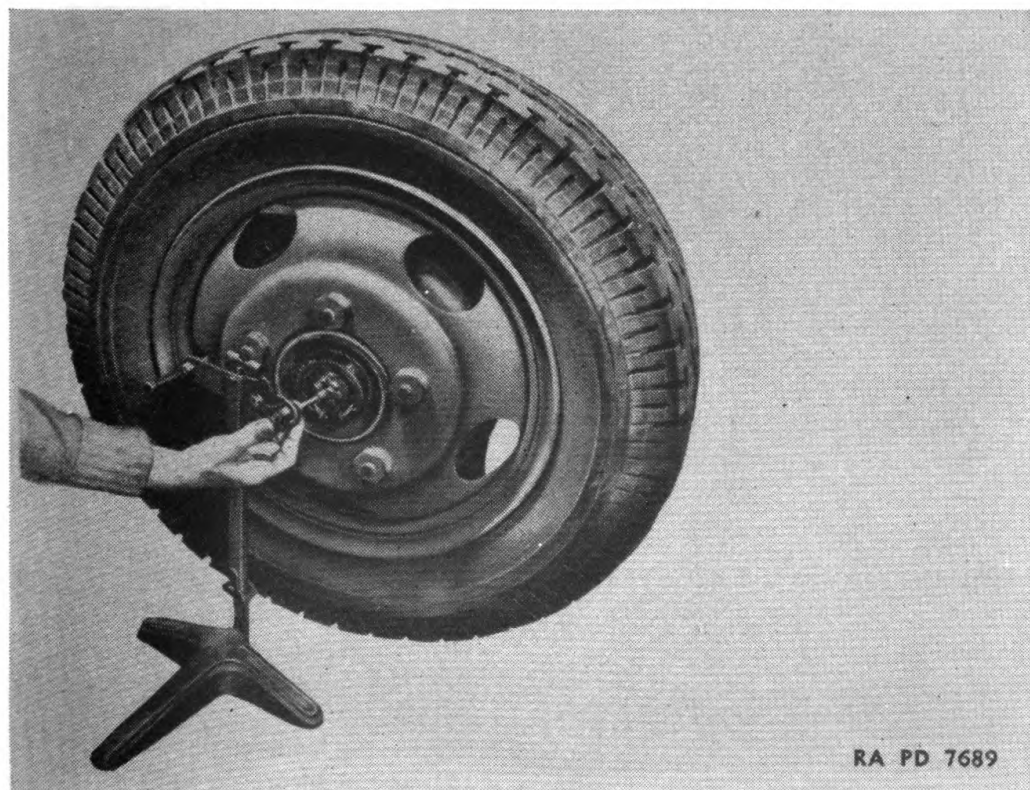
Caster gage w/right spring plunger in wheel spindle lathe center for gage reading.
